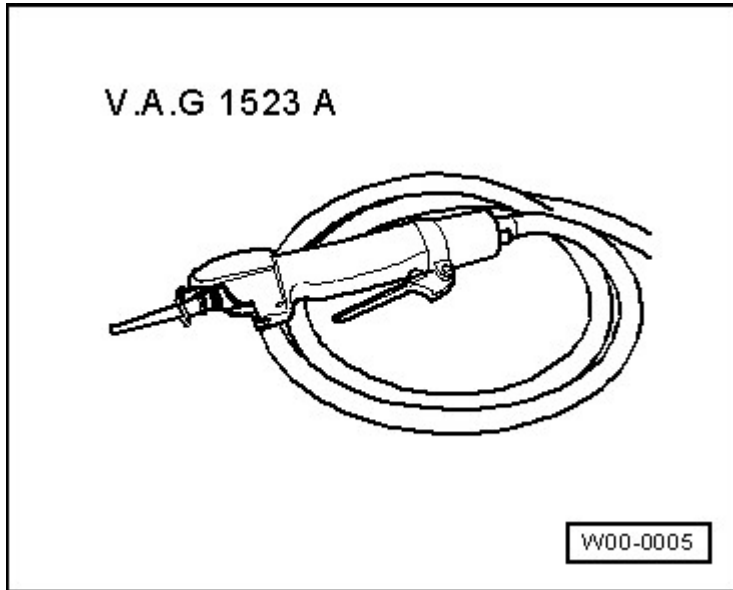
Identifying Body Repair Saw V.A.G 1523 A
